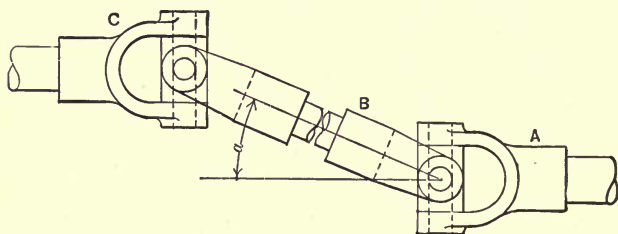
Application of Universal Joints and Telescoping Shaft.
